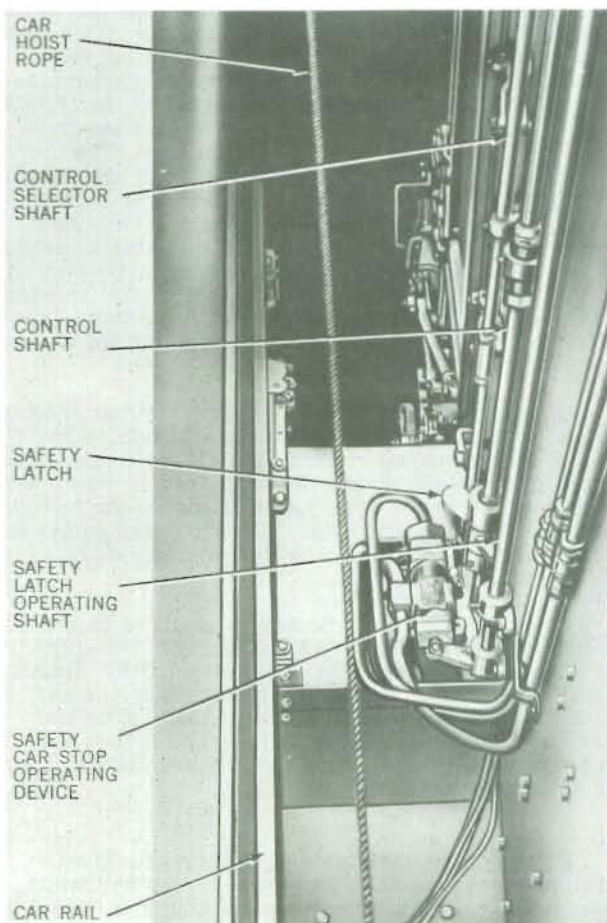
Powder Hoist Car Stop Assembly - General Arrangement
